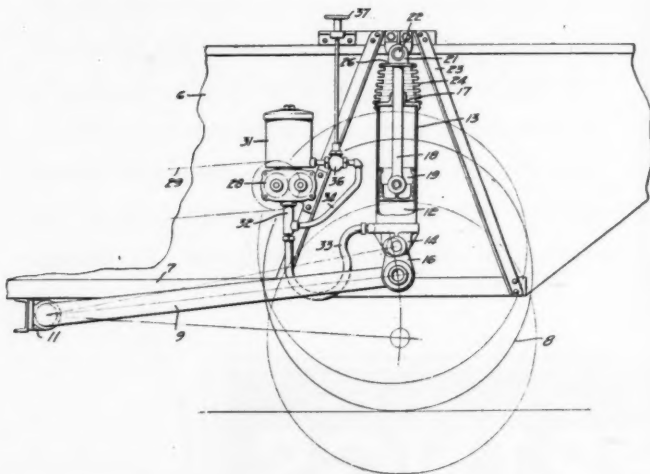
Hydraulic device maintains harvester mechanism on level plane while machine is traveling on a hillside
